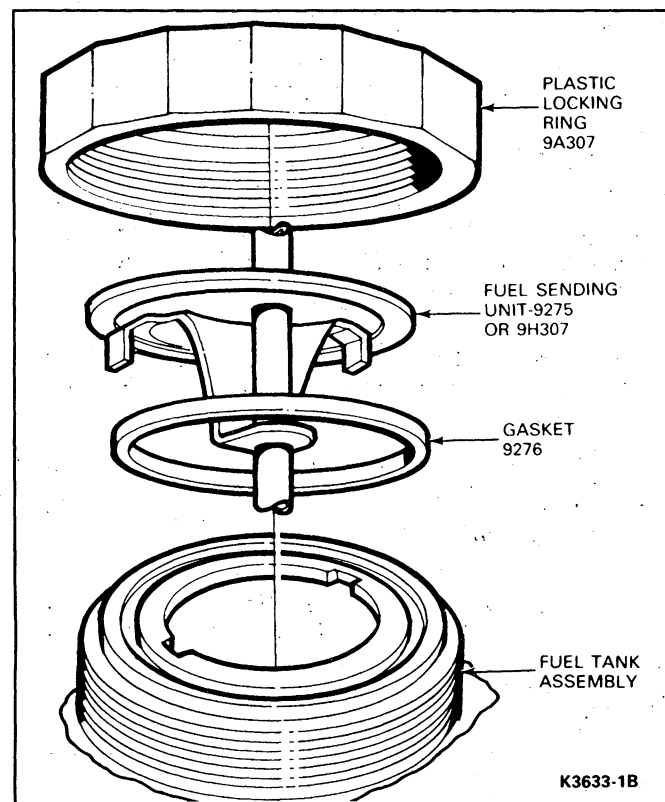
Fuel Tank Sender Installation (Plastic Locking Ring Type)—F-350 and F-Super Duty Chassis Cab
